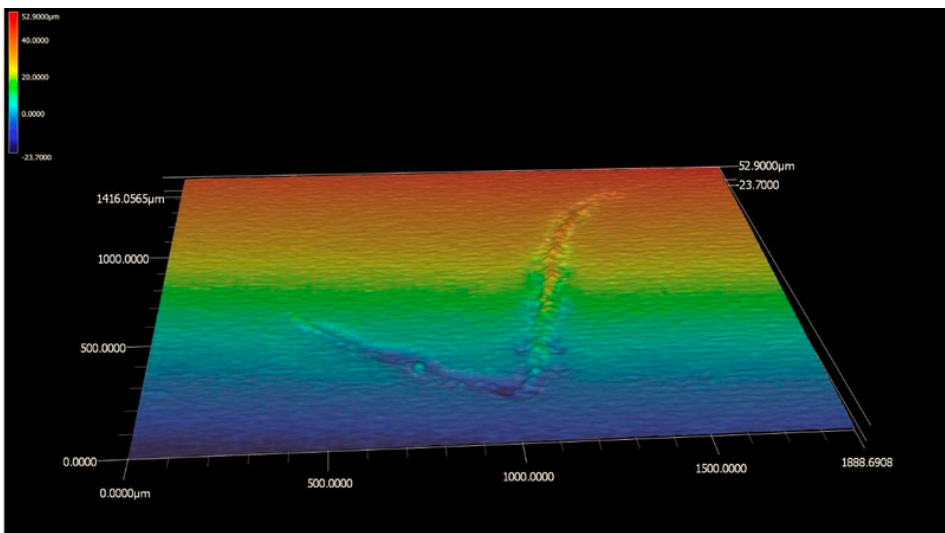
Surface scan of a mold wipe fiber molded onto a part surface
